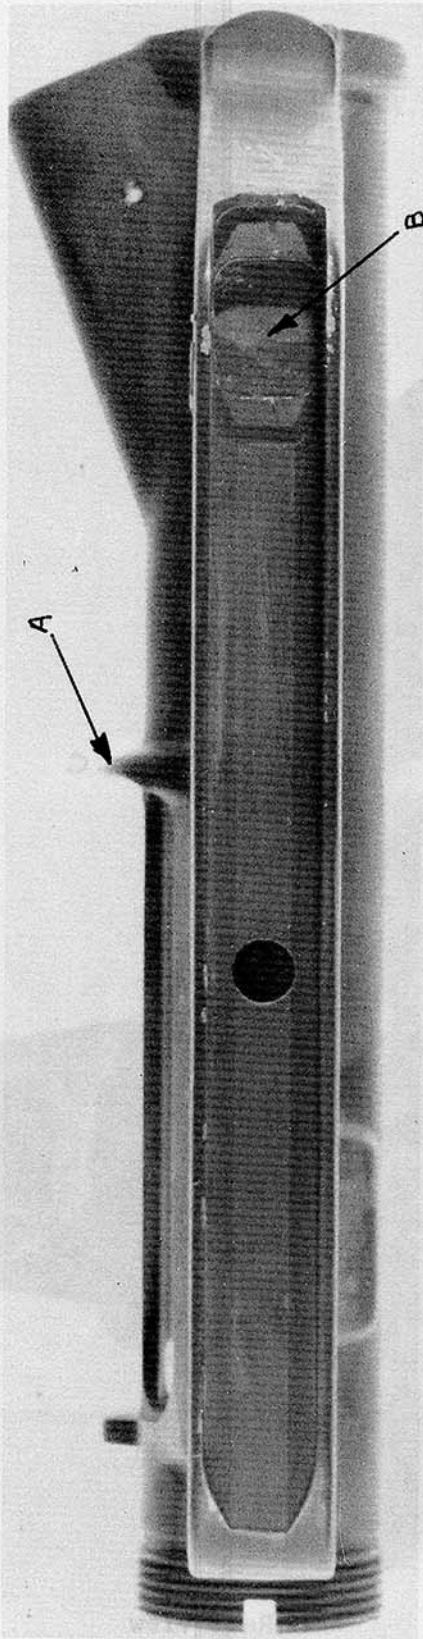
Upper receiver (US supply part - "CH" manufacturer mark).
